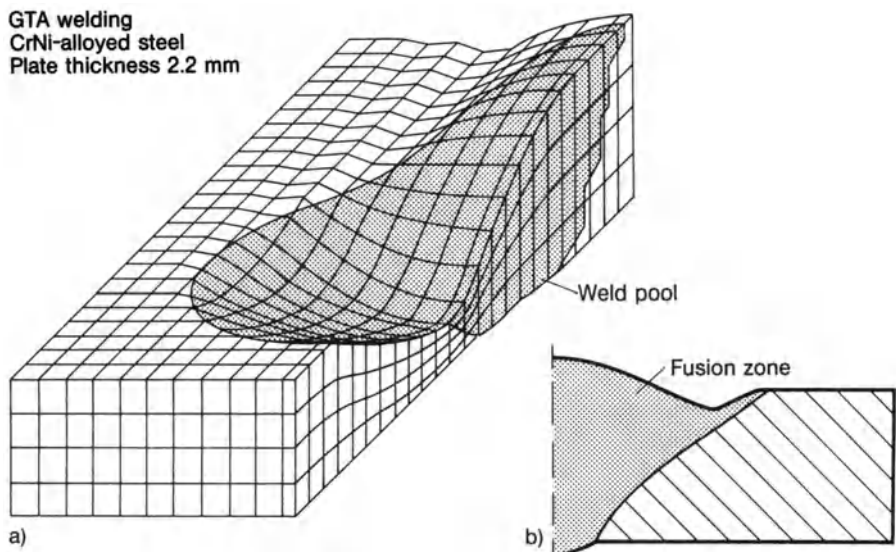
Weld pool (a) and finished weld shape (b), analytical results based on hydrostatic modelling, gas tungsten arc welding ( $I = 430$  A,  $v = 30$  mm/s,  $l_a = 1$  mm) of CrNi-alloyed steel (plate thickness 2.2 mm); after Sudnik [86]
